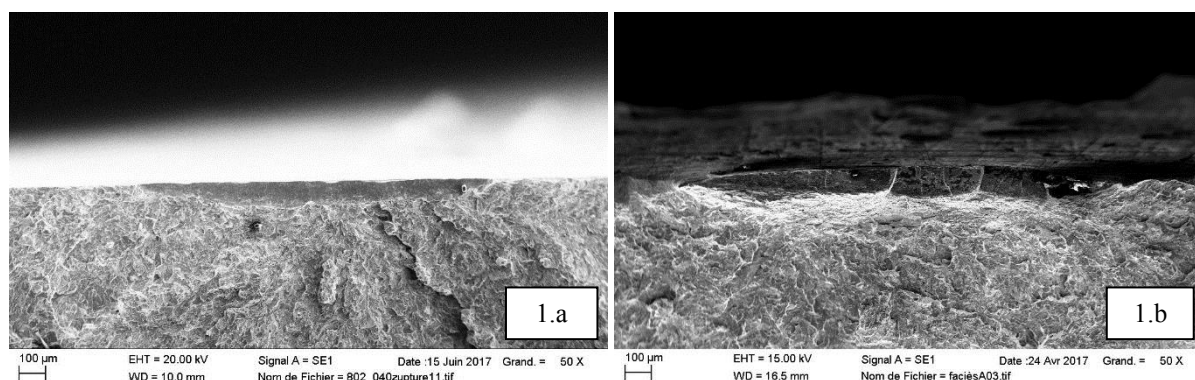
Fracture surface - fatigue crack detected in the body of railway axle (SEM observation)
